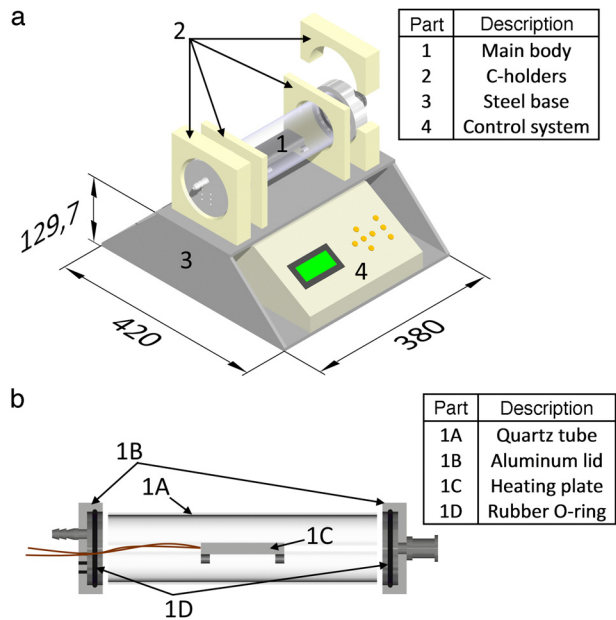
Components of the electric oven: (a) major components, (b) detail of the sub-components of the main body. Dimensions in mm.
